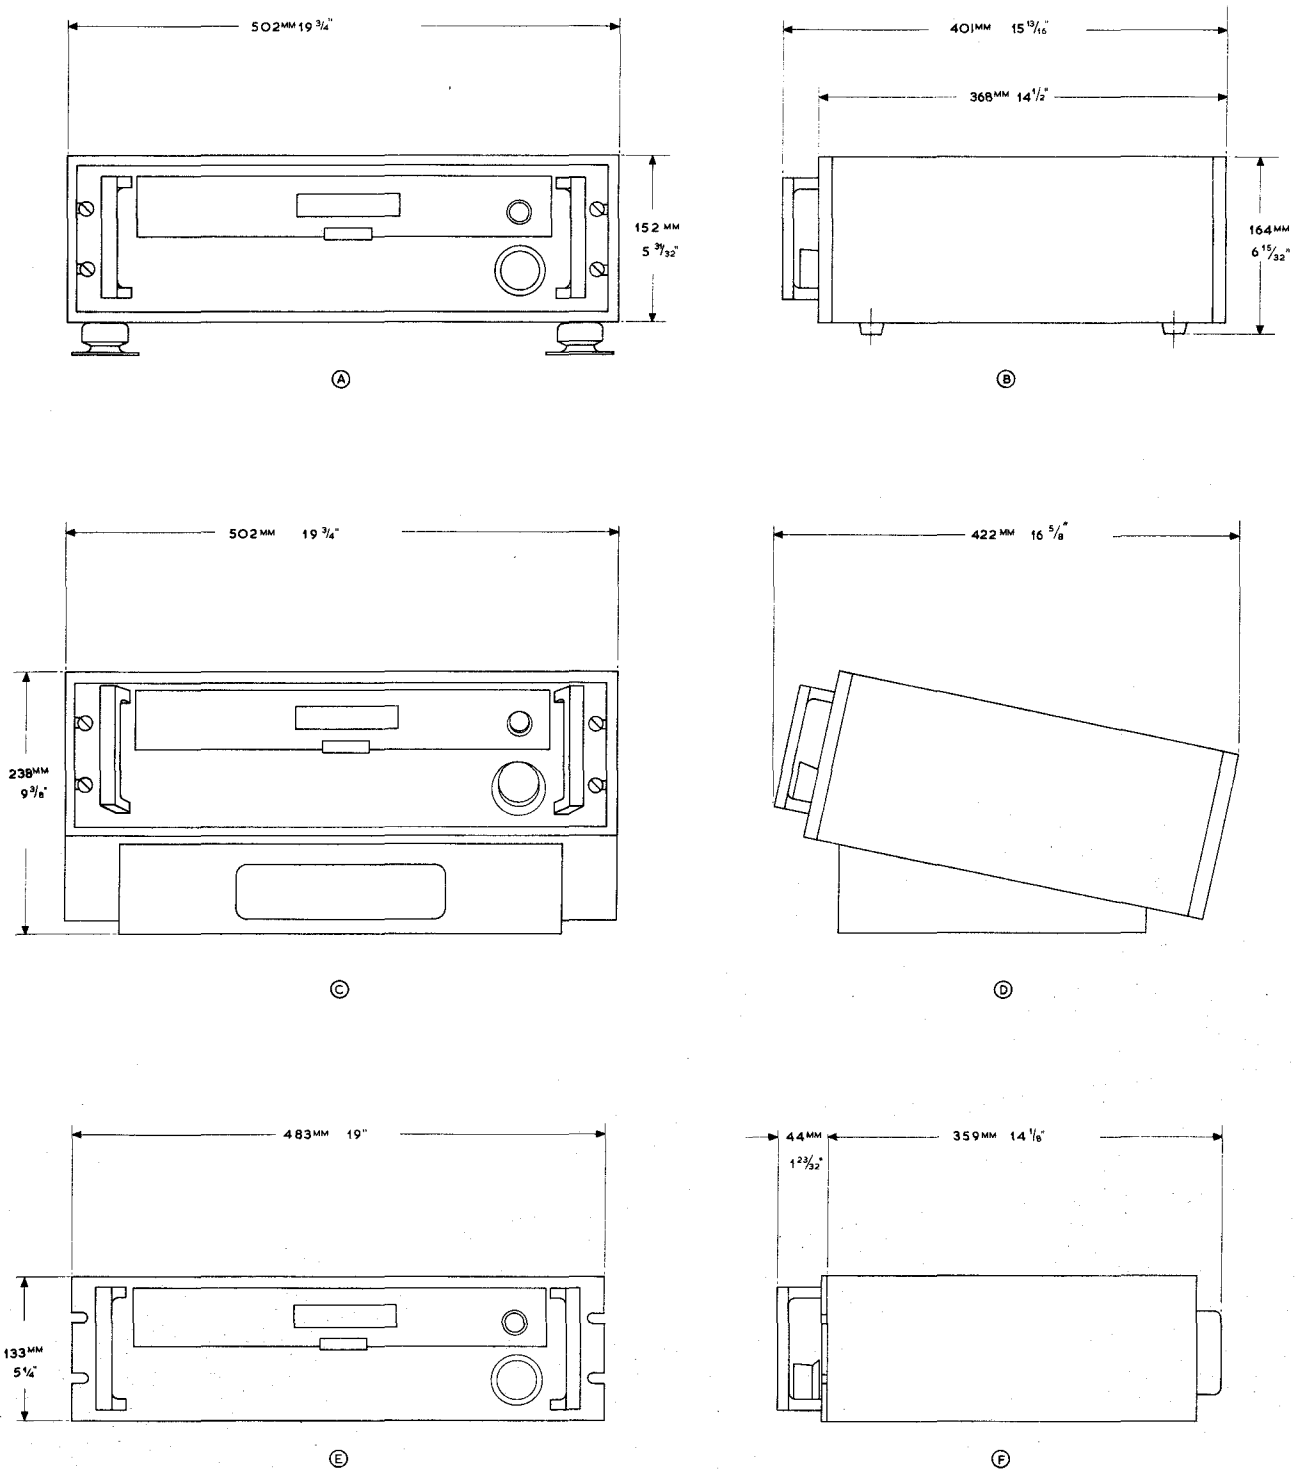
Dimensions of the Receiver in all mounting styles.
